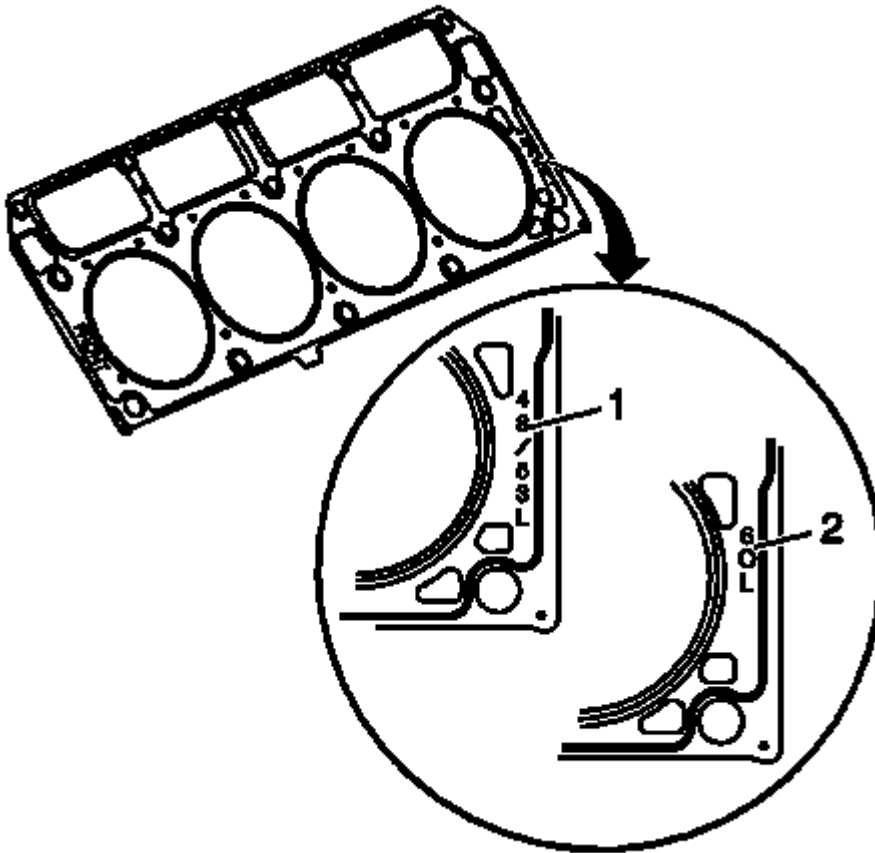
View Of Cylinder Head Gasket Displacement Markings
